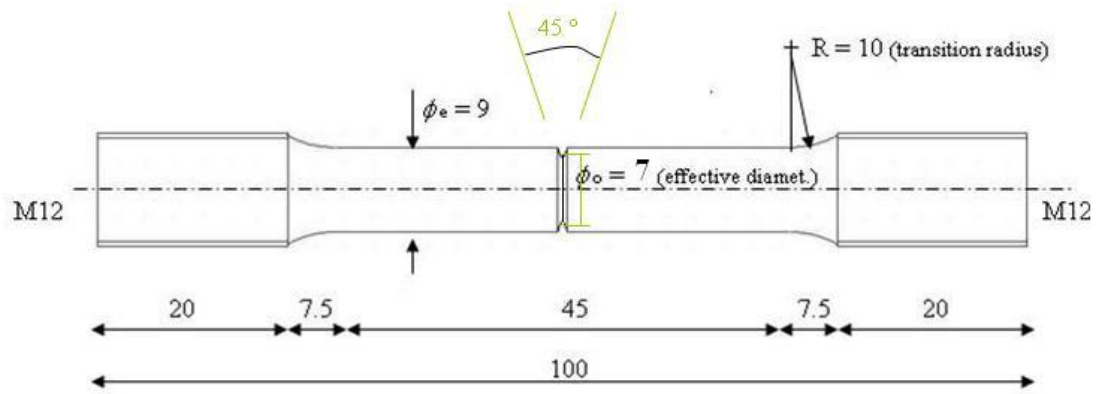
Sharp-notched tensile specimen for fracture toughness purposes.
